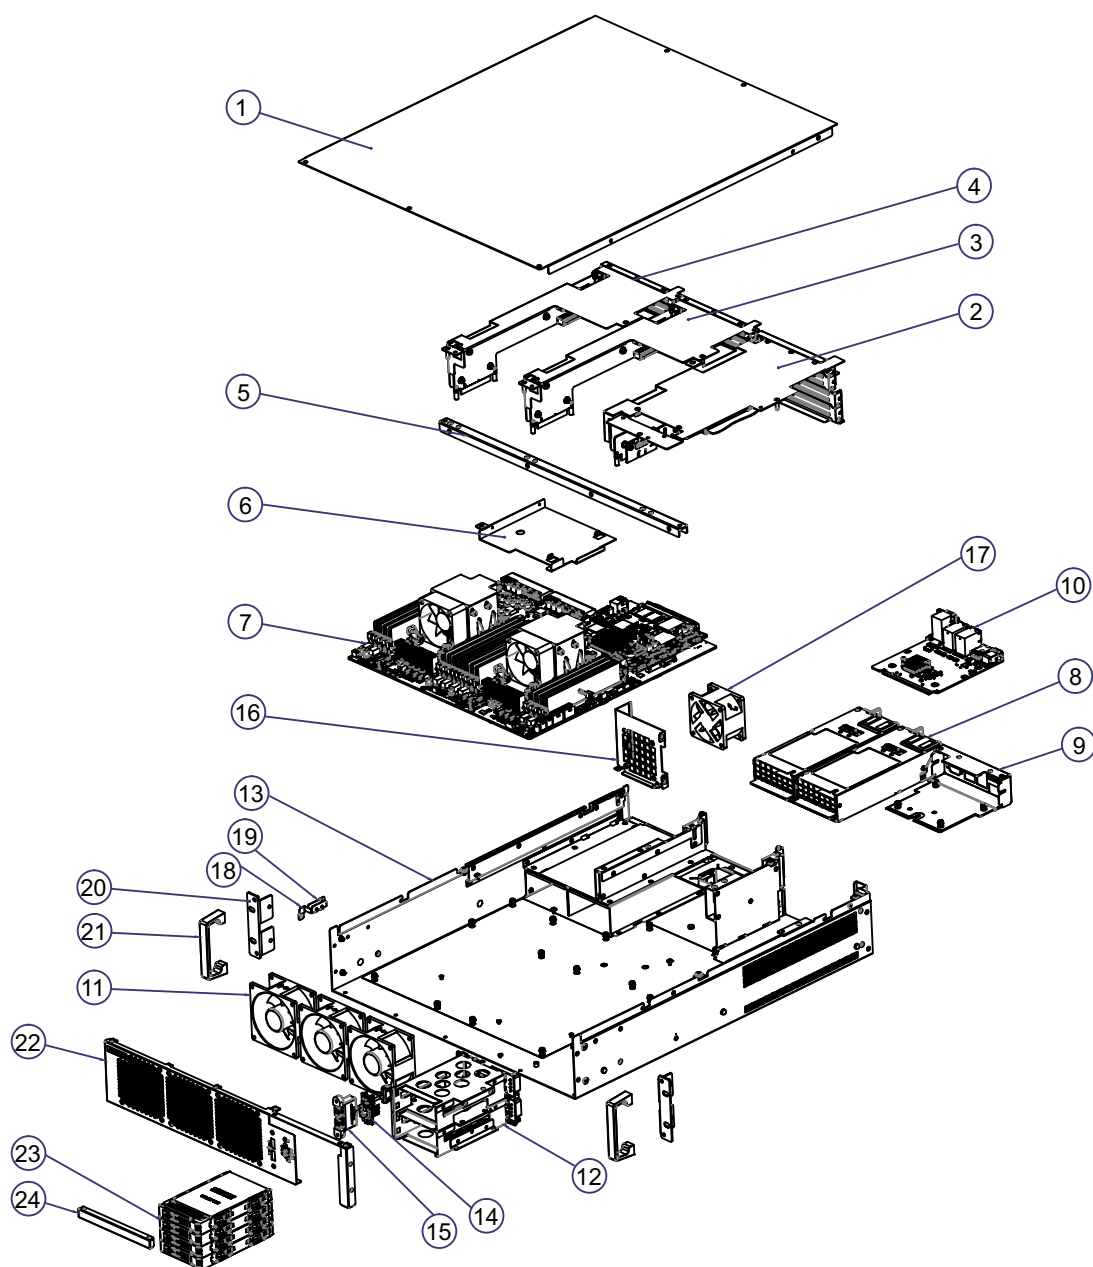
Exploded Diagram & Parts List/ 分解图 & 部件列表 / 分解圖 & 零件表
